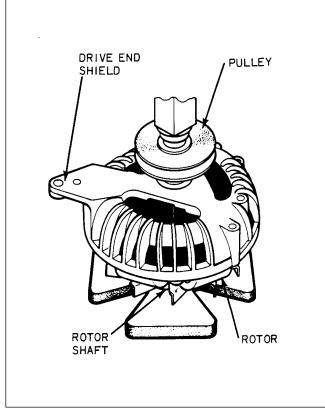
Installing Drive End Shield and Bearing (Typical)
